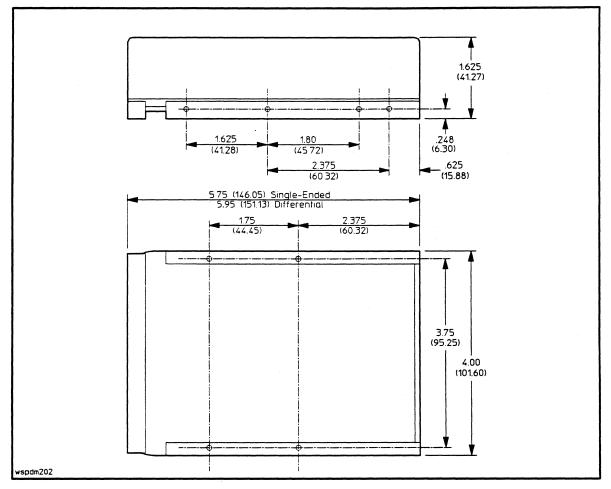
Narrow, Single-Ended: Disk Drive Dimensions and Mounting Locations
